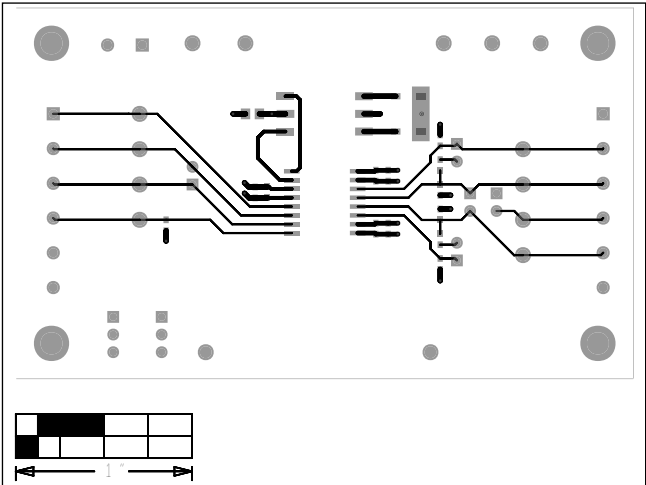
MAX148X2 EV Kit PCB Layout—Component Side
